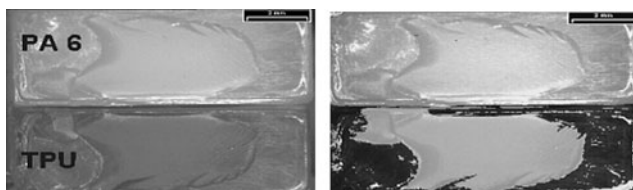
Interface reactive two-component injection moulding – image of fractured specimen after tensile test, polyamide bulk material on the TPU fracture surface (right – fracture with coloured TPU part for differentiation)
